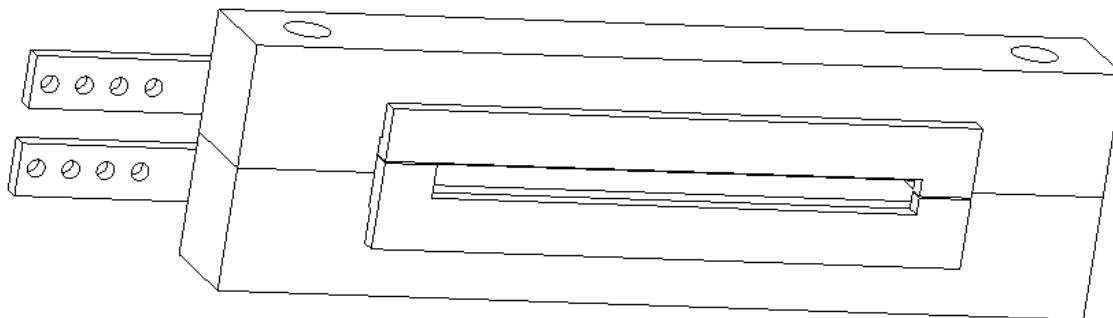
Backside view of chicane magnet (yoke bolts not shown)
